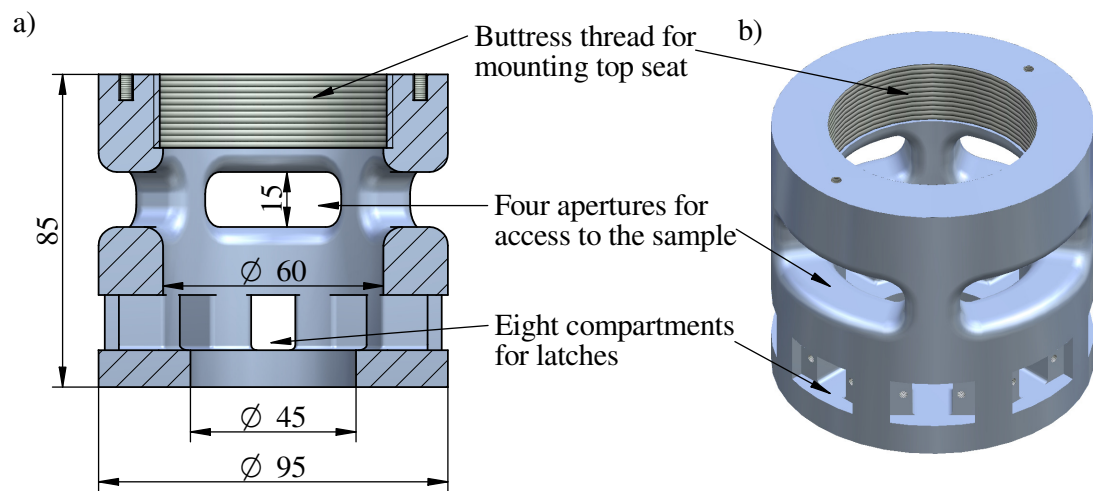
(a) Cross-sectional and (b) isometric views of the body of the clamp.
